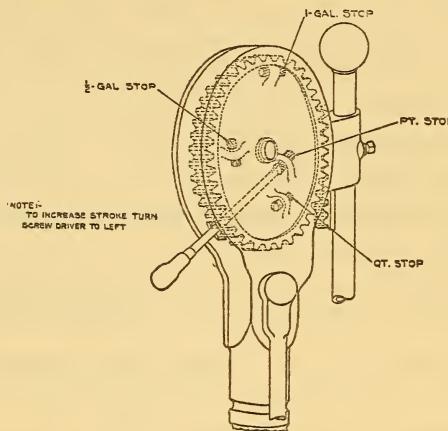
The adjustments of this type are usually secured by sealing shut the case inclosing the gear. If this can not be done, or if there are slots in the gear case through which the screws may be reached from the outside, holes should be drilled through the set screws in the interior of the case and the usual seal wires passed through these holes to prevent the screws from being moved
